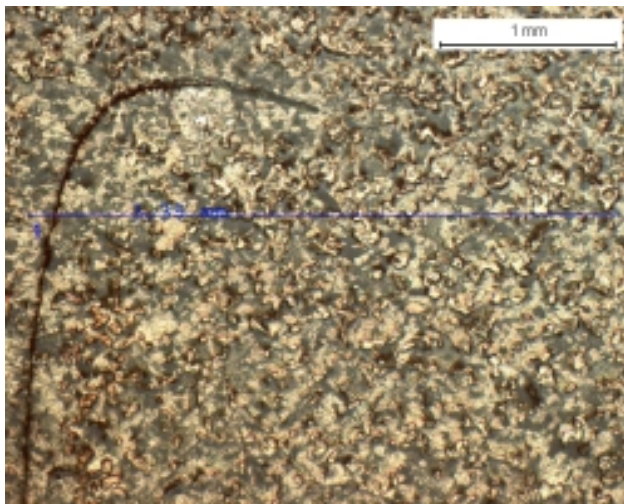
Cross section of a JLH (Joint Line Hooking)
